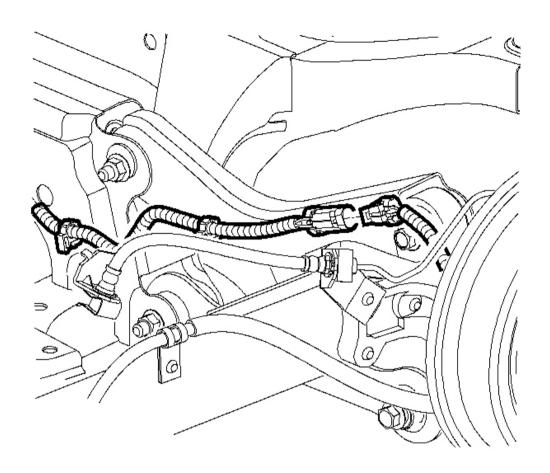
Wheel Speed Sensor Electrical Connector Courtesy of GENERAL MOTORS CORP.
